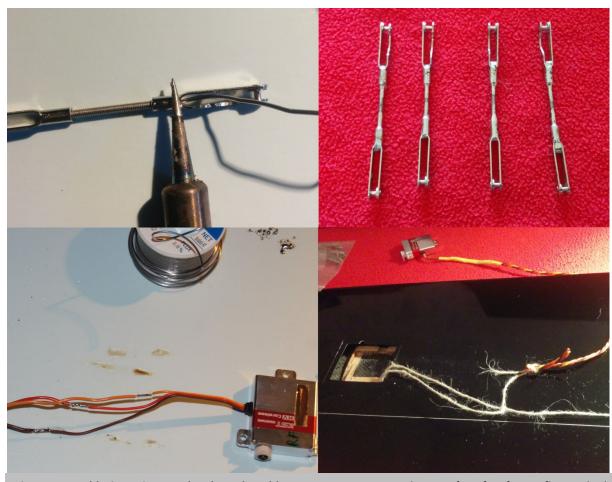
Soldering wing -pushrods and –cable trees: To ensure a tolerance free fit of your flap and ail linkage systems it is advisable to permanently fix both clevises on either side of the threaded rod by using super glue or, as shown here by soldering them (upper left). For the end result, see (upper right). While you're at soldering, I suggest to also prepare the wing cable trees. A conventional 3 x 0,34 qmm diameter twisted servo cable will do perfectly for this job. Solder each of the four servos with a piece of cable long enough to protrude 10cm out of the wing at the wing base. I simply cut the cables of the servos sequentially, interspaced by 3cm and vice versa for the connector cables. This way I can solder them (lower left) and subsequently cover them using just one heat shrink tubing (yellow, on top of lower right panel). Next, fiddle any type of cord from the wing base to the servo bays using e.g. on fo the provided carbon tubes (figure 1g) and a piece of tape to fix the cord to the tube. Next, you can knot the readily soldered servo cables to the cord and pull each one through the wing.
